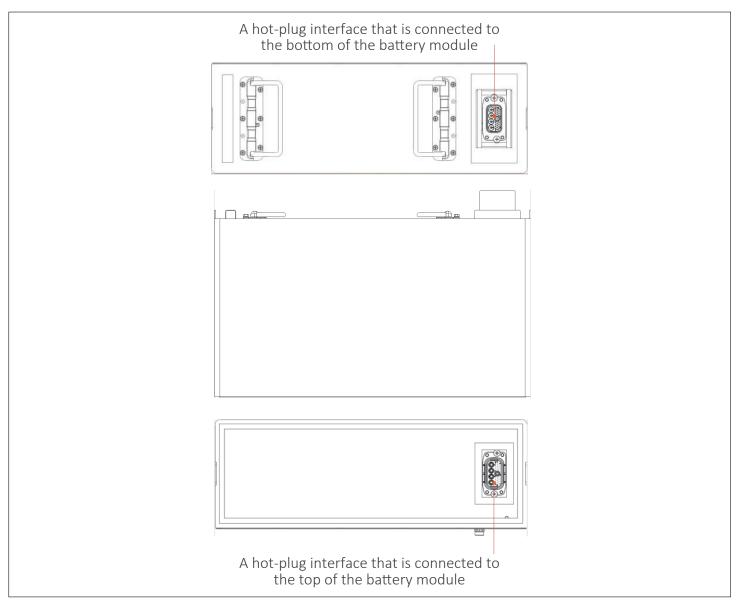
Details: SLAVE module (H02-SLAVE)
